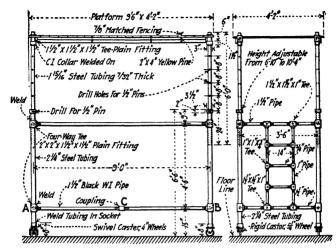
Portable staging constructed of steel tubing or iron pipe. Black iron pipe is quite as satisfactory as tubing. When working above machines, the bottom rail AB may be taken out by unscrewing the right-and-left coupling C, so that the staging may straddle the machines (L. B. C. in Industrial Engineer, July, 1923).
